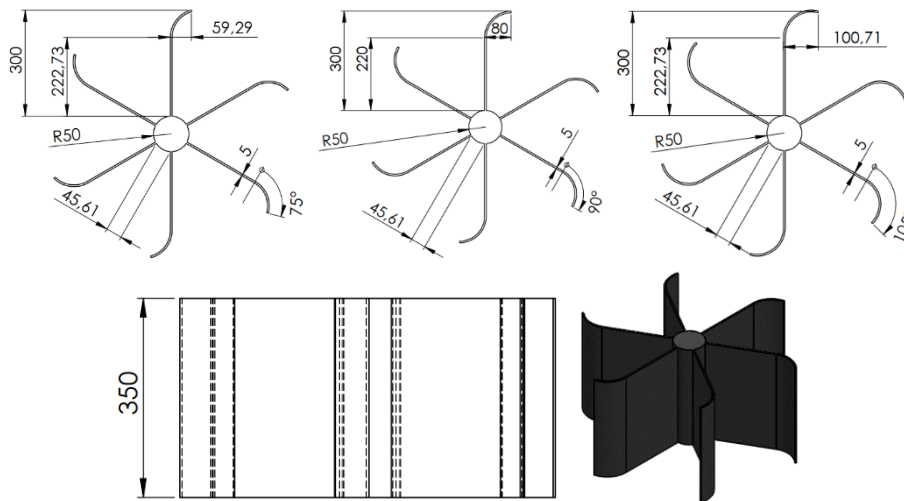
Dimensions of the 6-bladed turbine, featuring blade angles of 75° , 90° , and 105° (in mm)
